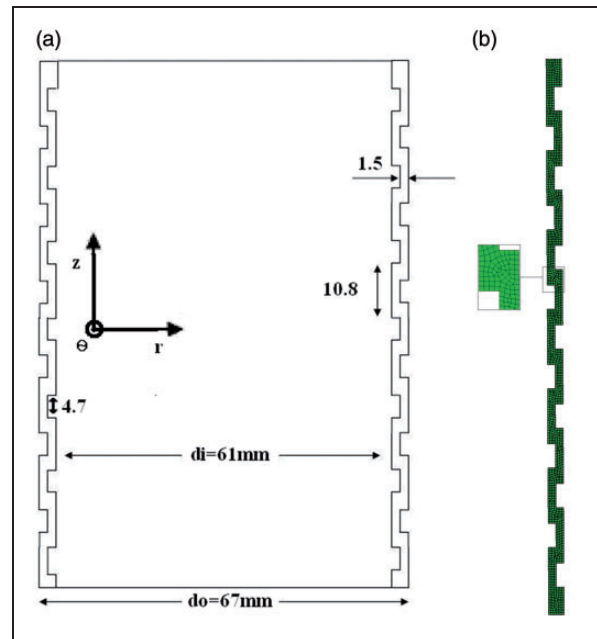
(a) Cross section of grooved specimen; (b) meshed cross section of specimen.
